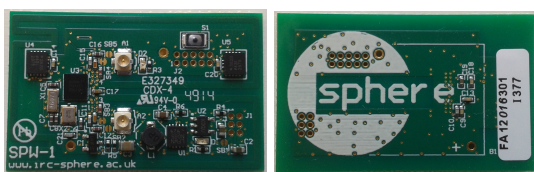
SPW-1: Top view (left) and bottom view (right) of the circuit board.
